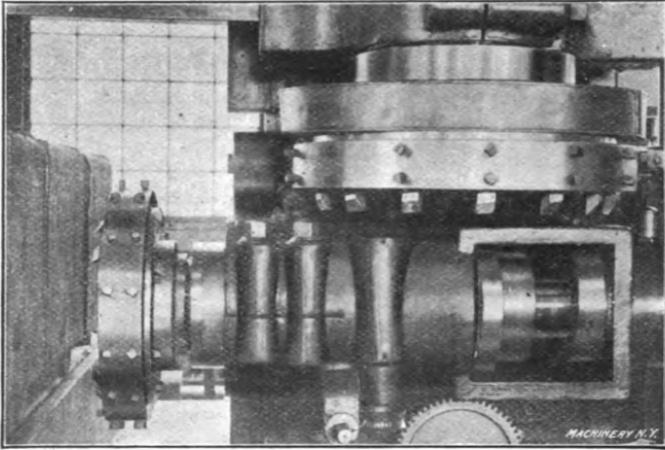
Rotary Planer Heads, with Abutment Ring for Locating Removable Blades
